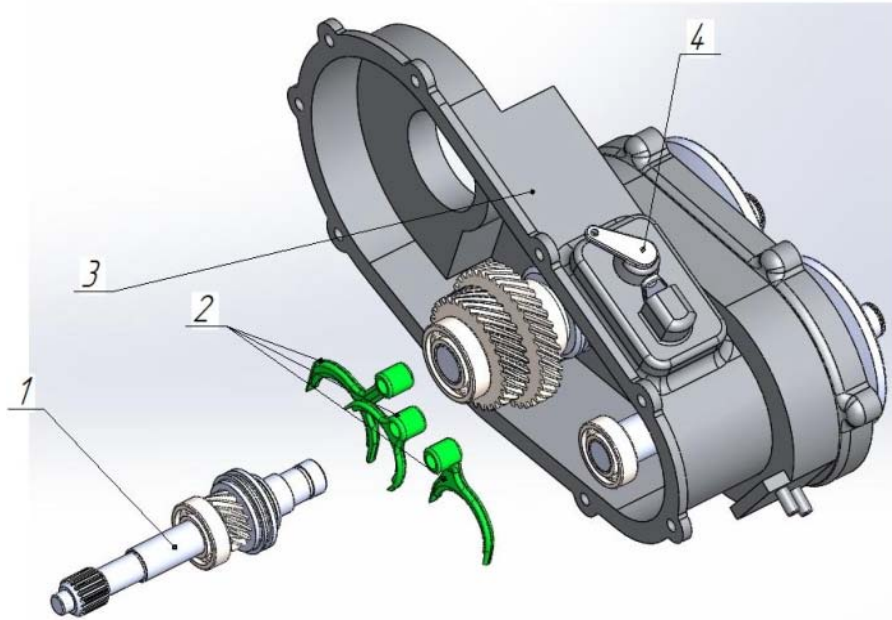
Reverse gear engagement mechanism: 1) Drive shaft; 2) Reverse gear forks; 3) Variator housing and 4) Switching mechanism
